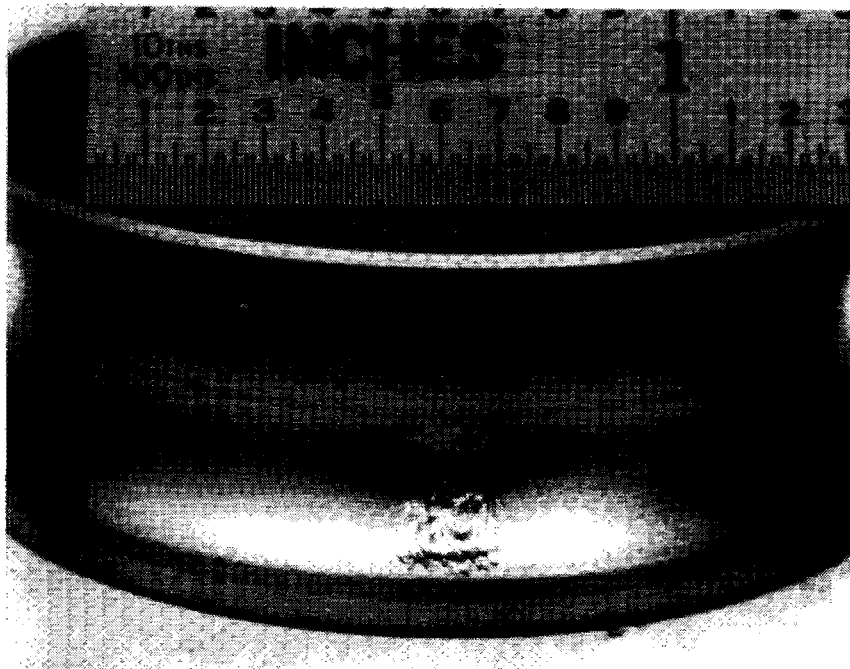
42-Degree Gearbox -143 Bearing Inner Race C/D,
